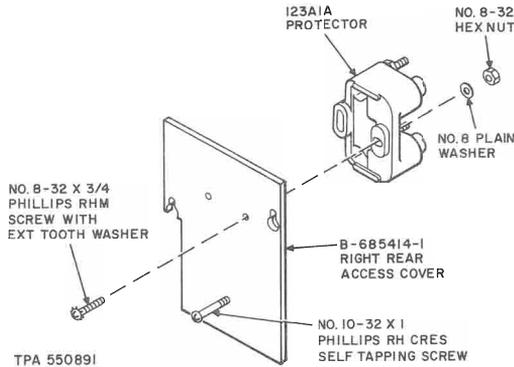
Assembly of 123A1A Protector on Right Rear Access Cover
